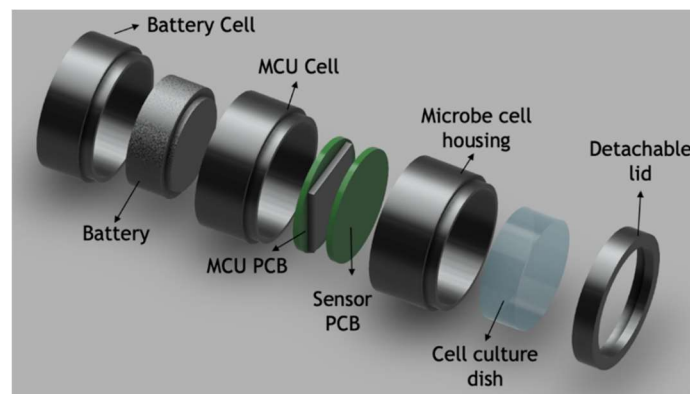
Exploded view of the Microbial Pill Sensor Housing design
